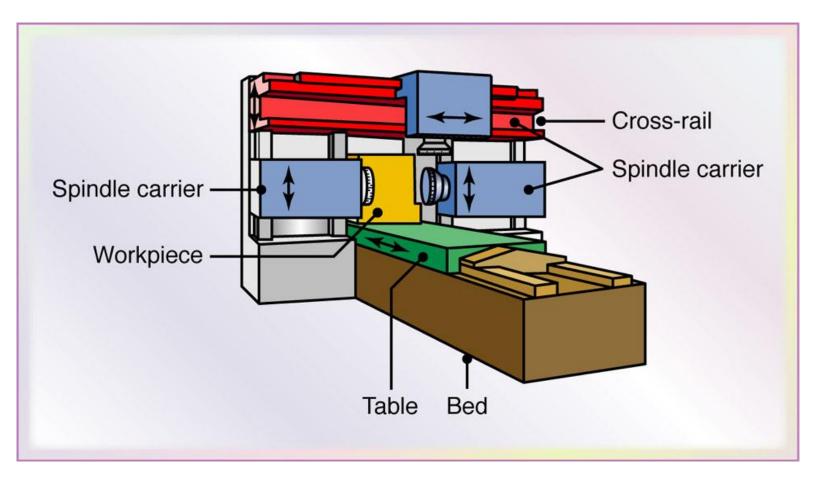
Schematic illustration of a bed-type milling machine.
